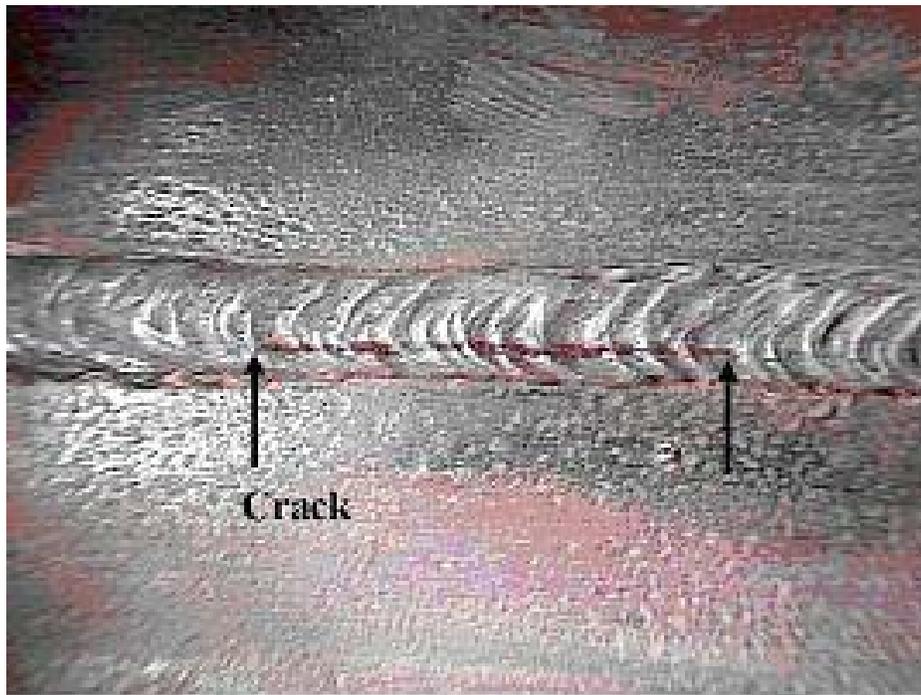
Fatigue crack in a 16-inch pipe-to-elbow weld in the fill line of crude oil storage tank after 50 years in service.
